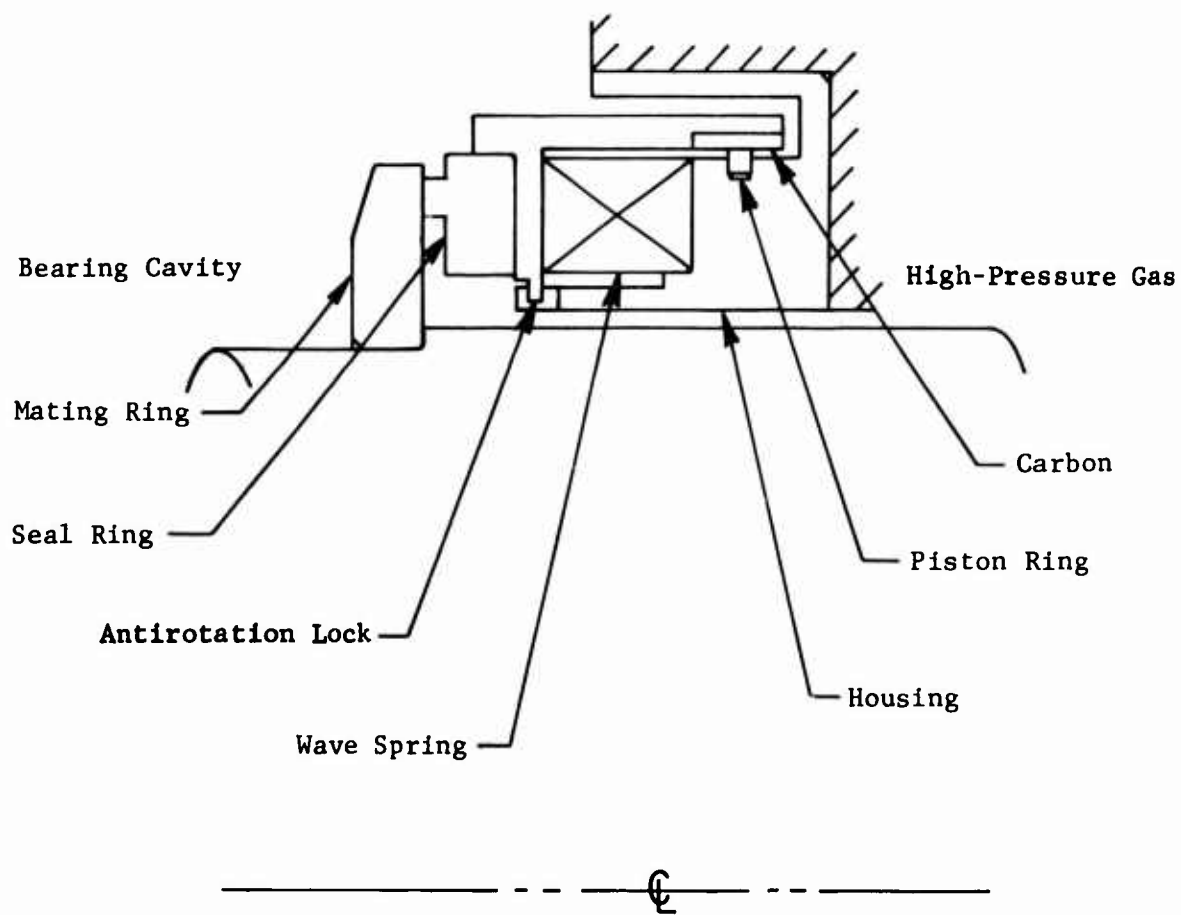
Face-Contact Carbon Seal With Piston Ring as Secondary Seal.
